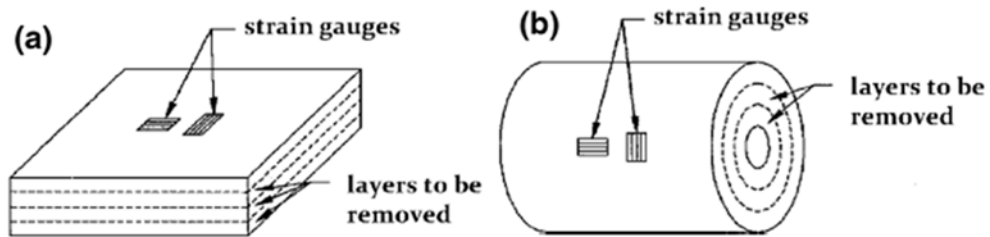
Layer removal method, (a) flat plate, (b) cylinder.
